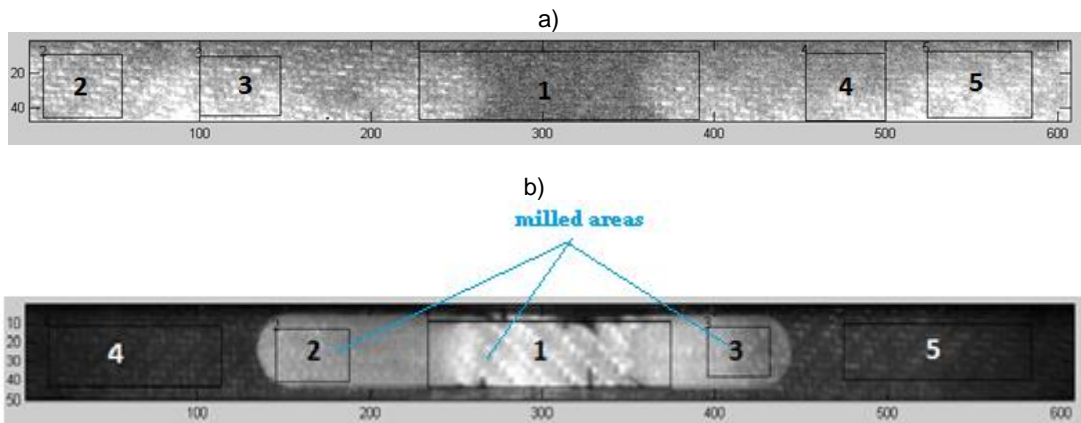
Pictures of the selected areas of the 1st burnt sample (a) without milled groove, (b) with milled groove (0.7mm deep)
